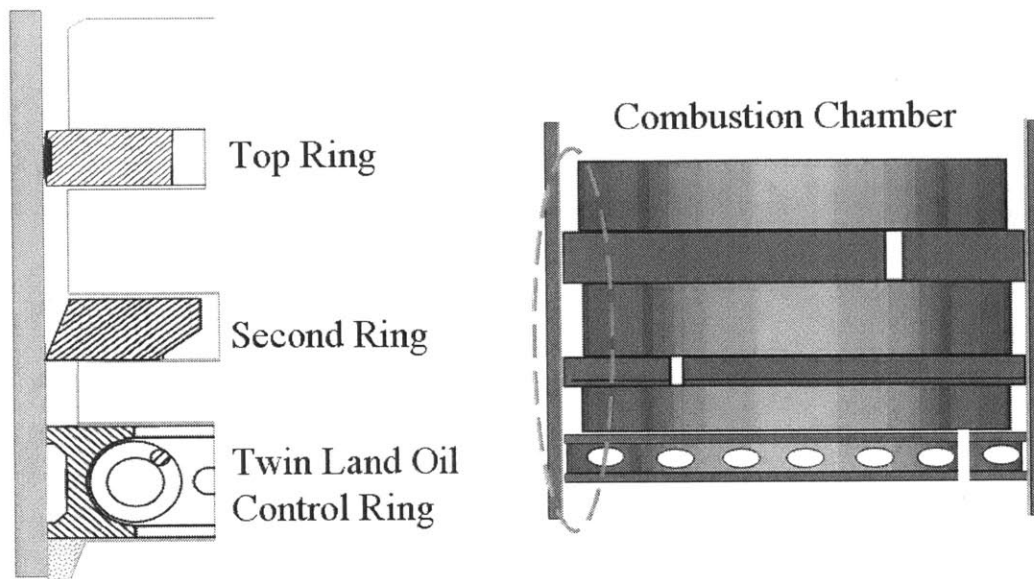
2: Piston Ring Pack in Combustion Chamber of an Internal Combustion Engine
